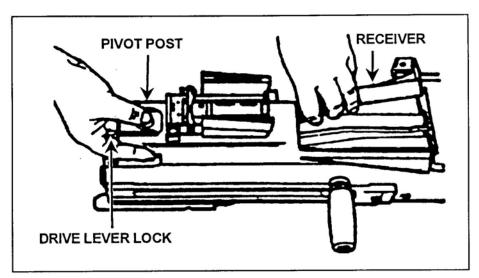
Removal of the primary drive lever and vertical cam assembly.
